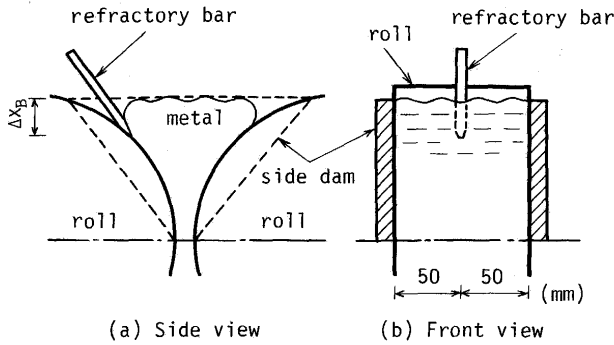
Schematic view of refractory bar immersed in molten steel between rolls.
